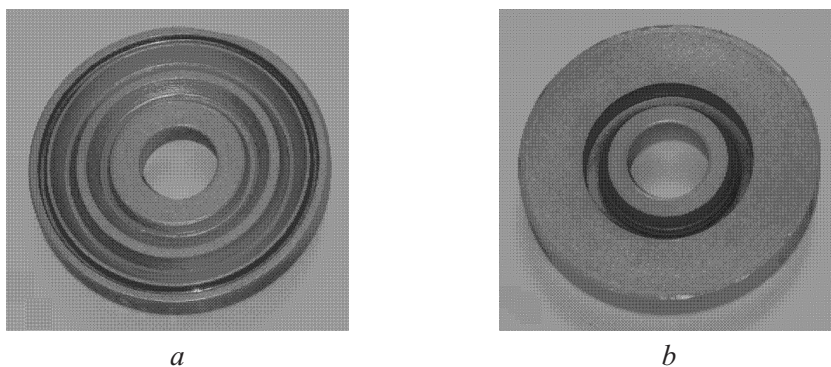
Fixtures for experimental test: (a) simply supported; (b) clamped.
